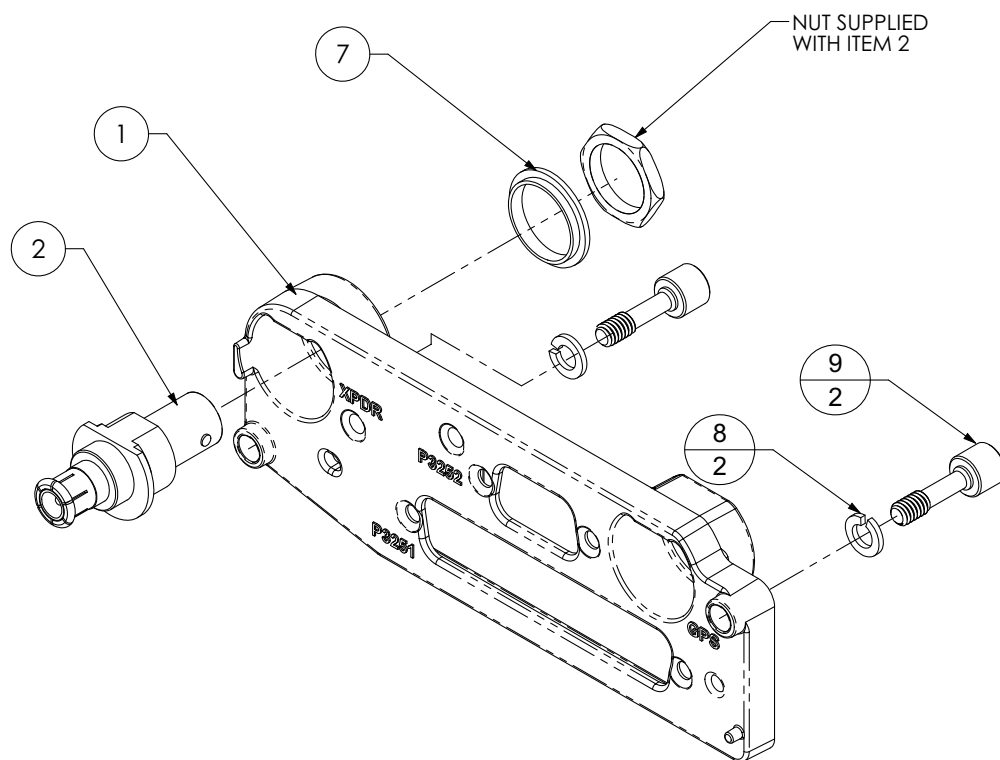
GTX 3X5 Vertical Mount without GPS, Back Plate Assembly (P/N 011-02976-10)
